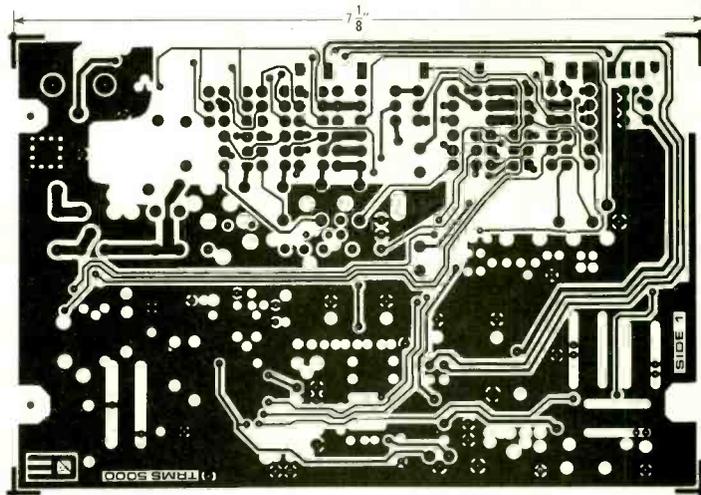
FOIL PATTERN for Side 1, the top surface of the main board. Pattern is approximately one-half size. Enlarge to $7/8$ inches across.
